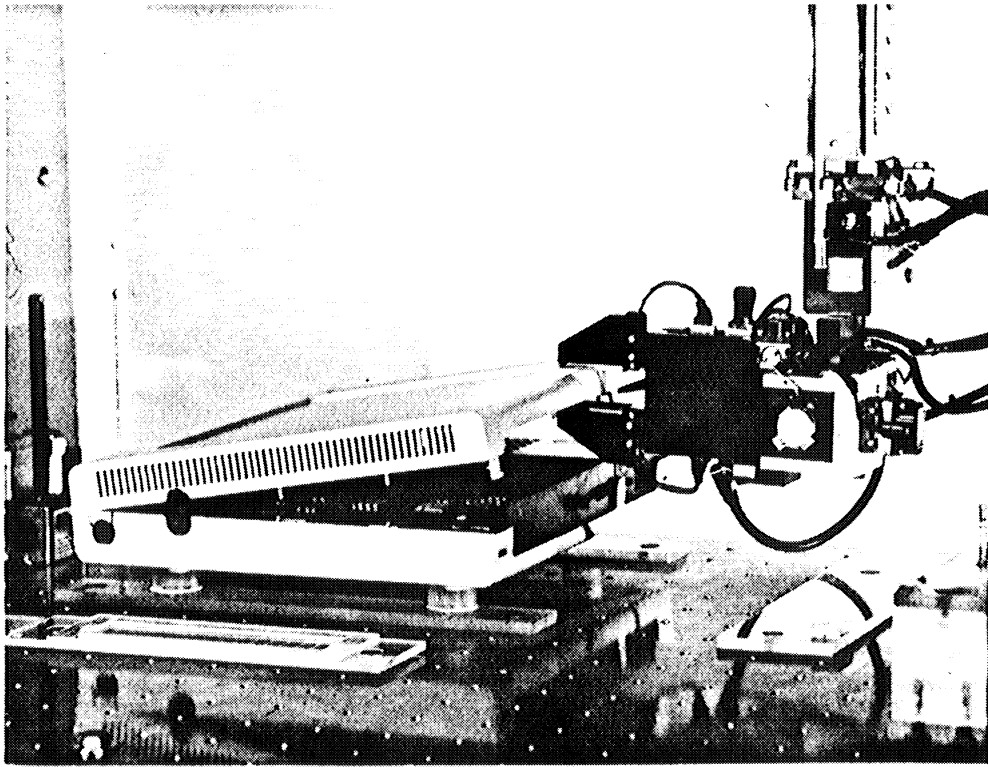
c. Part Is Carried To The Top Of Rest Of The Assembly
